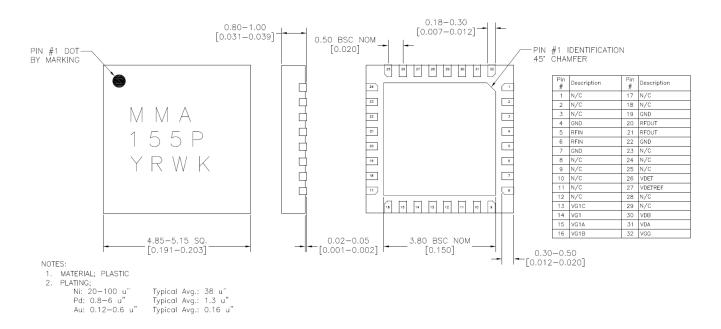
MMA155PP5 Package Outline Drawing (mm)
